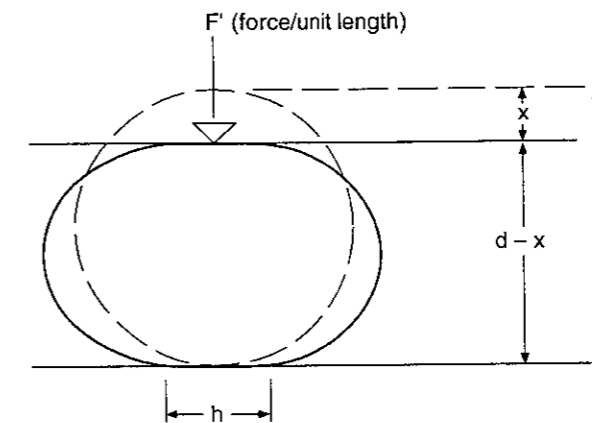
Compression of toroidal rubber ring between plane surfaces and cross-section
